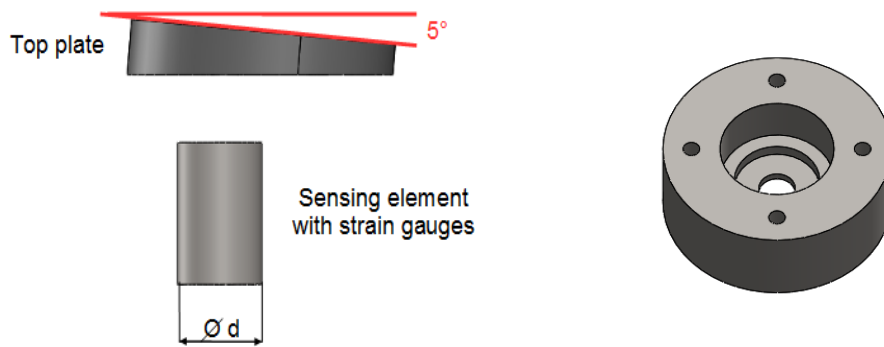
Second CAD design of the modular tibial tray (left) with a top plate and the sensing element. Second CAD design of distal plate(right), that becomes a distal support for the load cell.
